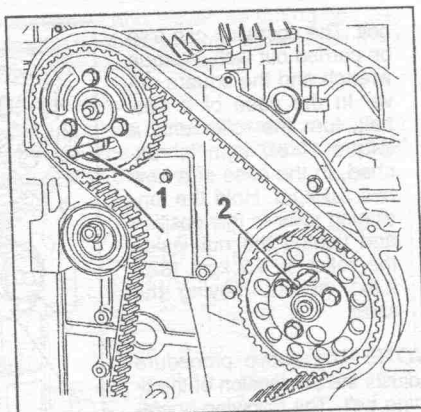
Camshaft sprocket and injection pump drive gear are locked with pegs (1) and (2).
